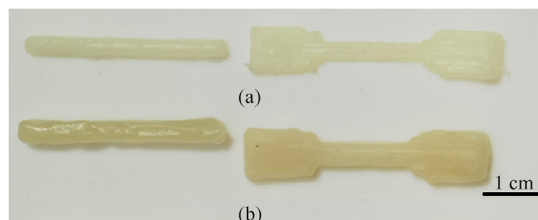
UV-assisted DIW printed (a) SMP composite samples and (b) pure SMP samples.
